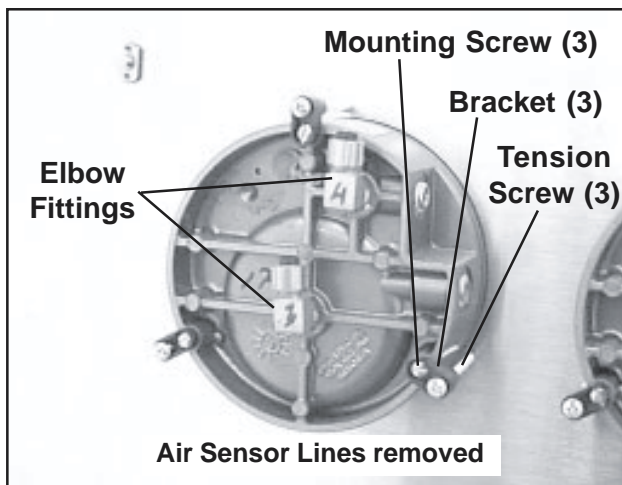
Filter Condition Blower Exhaust Gauge (other two gauges similar)
